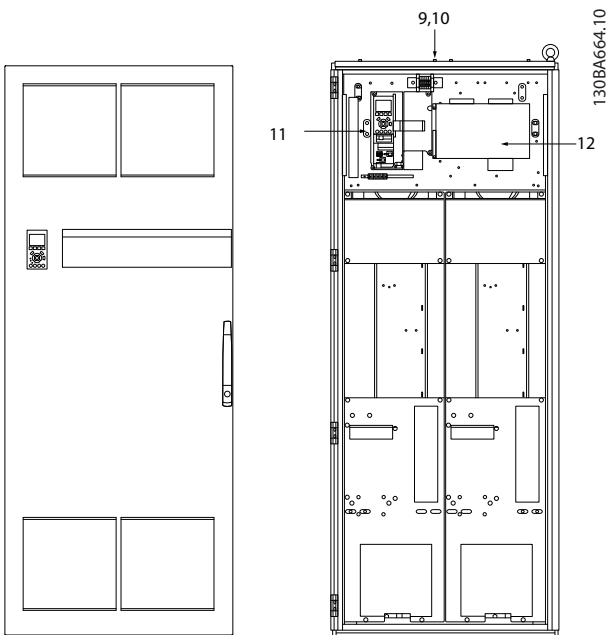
800 mm Cabinet Front Door and its Inside Views (One Drive Case)
